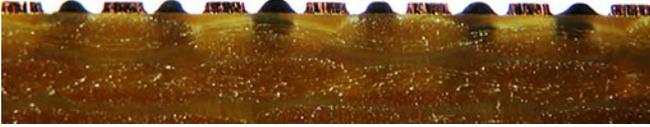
Cross-cut of IC pad section of a PCB with printed solder dams. The spacing between the copper pads is 5 mils.
